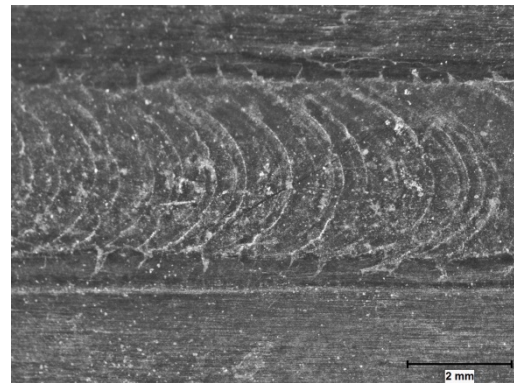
Microstructure of the weld performed at a welding speed of 8.47 mm/s and with the highest welding power (SC3)
